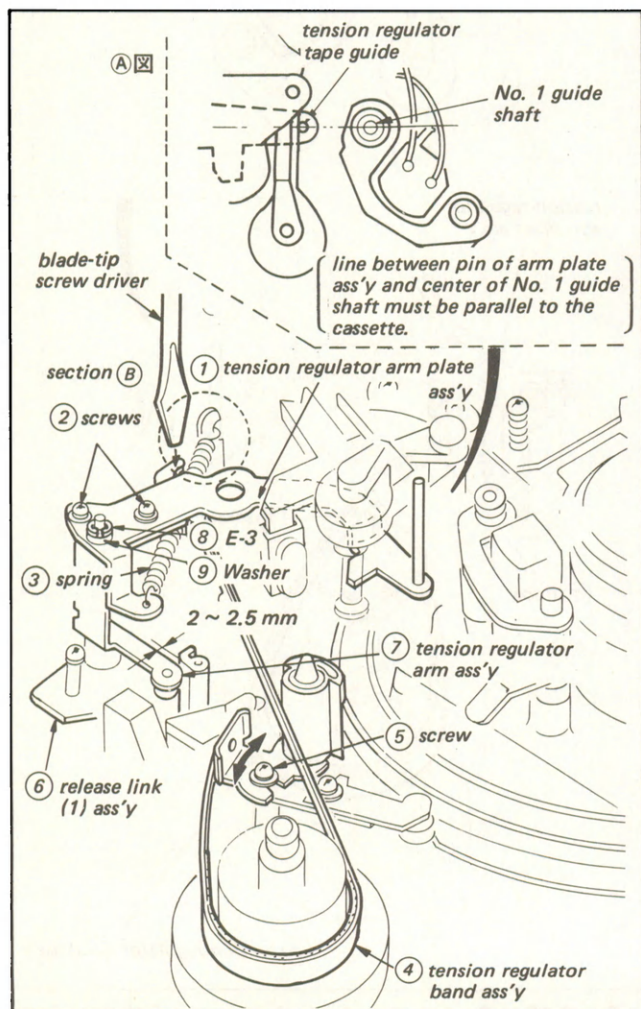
Replacement and adjustment (1) of tension regulator arm plate assembly
